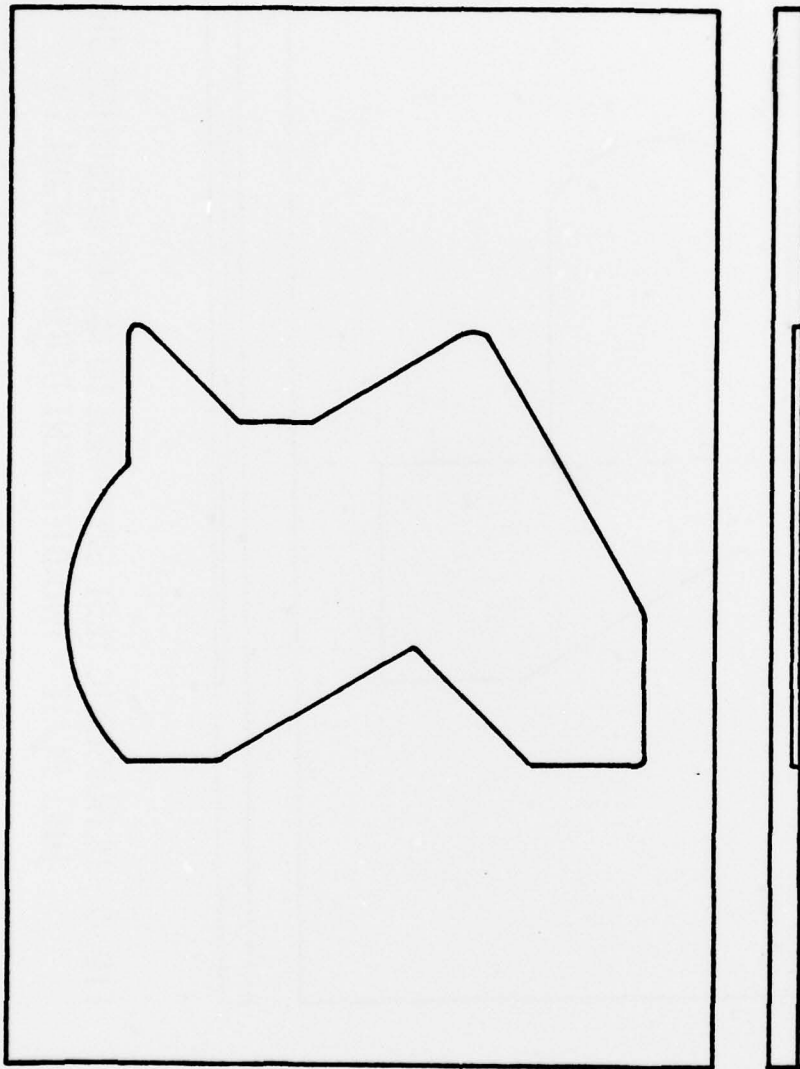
ULTRASONIC TEST SPECIMEN TO MODEL DEFECTIVE SHIP HULL PLATE ( MODEL 1 )
